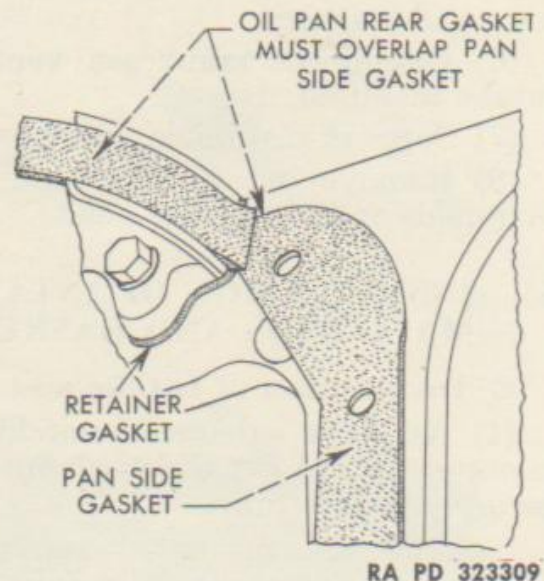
Oil Pan Side Gasket Overlapped by Rear Gasket
